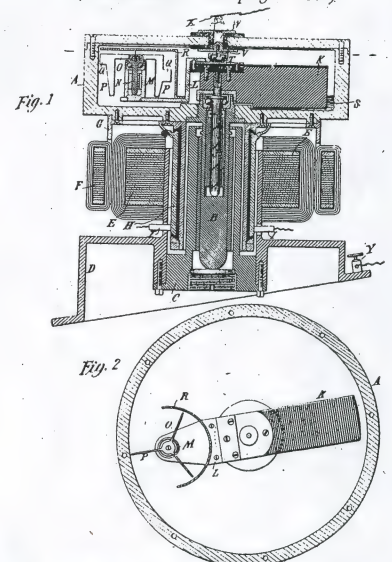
Electrical Oscillator, Illustrated in Fig. 15, Showing Details of Motor and Break Mechanism.
